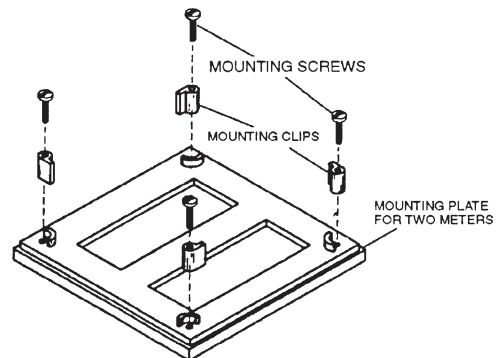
Adaptor Assemblies for 1/4 DIN Cutout (DP116-PB2 for 2 meters; DP116-PB3 for 3 meters)
